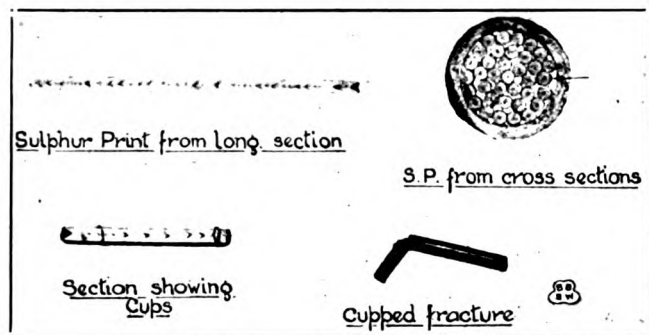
Composite photograph showing cupped wire due to axial segregates.
